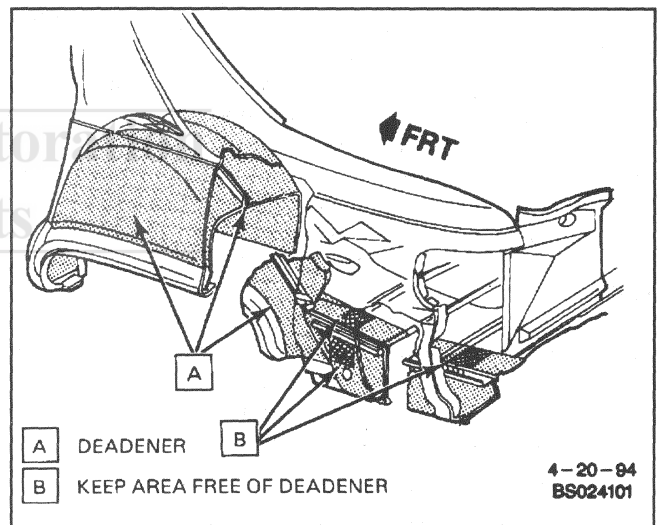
Typical Acoustic Deadener Application, Wheelhouse Panel and Floor Extension Areas - (Sedan)
